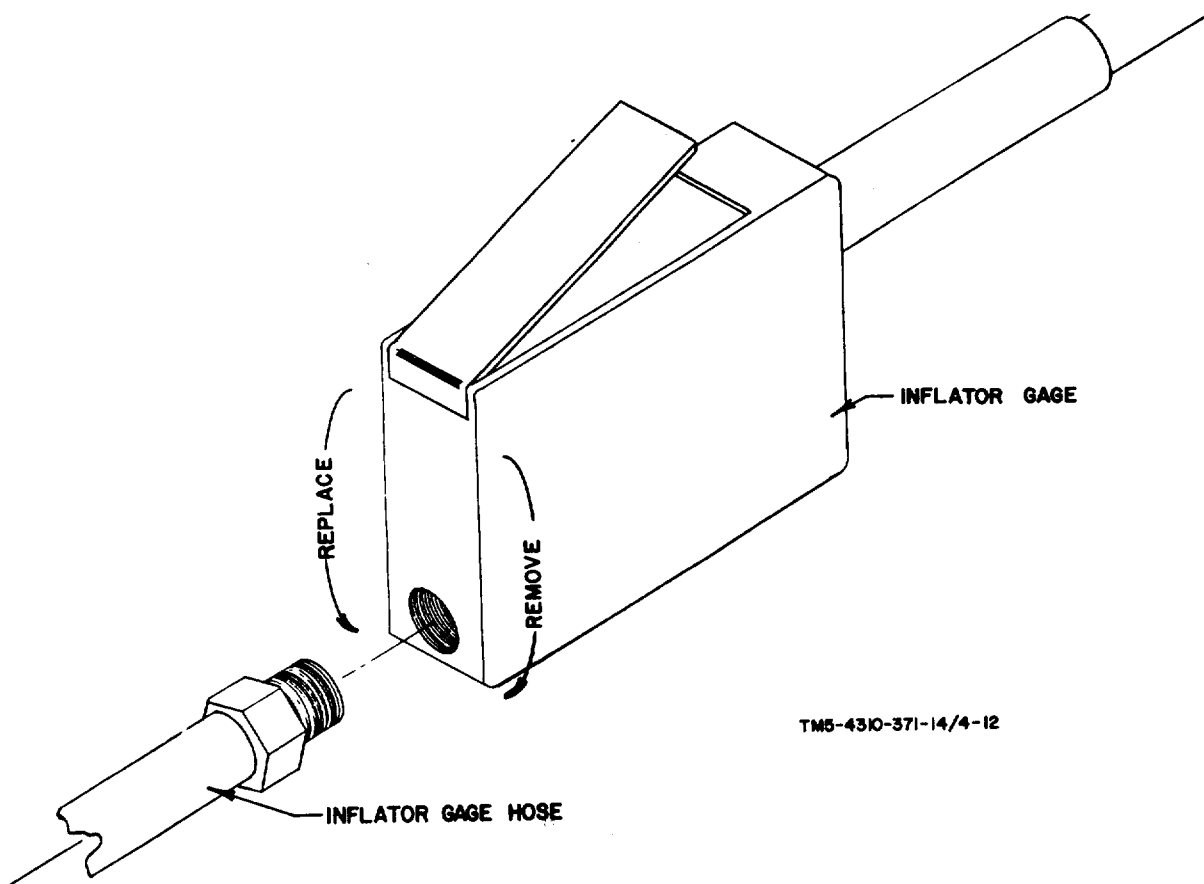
INFLATOR GAGE REPLACEMENT
